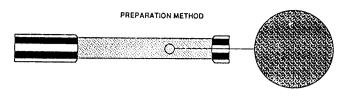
A 2- to 3-mil anchor-tooth profile.
